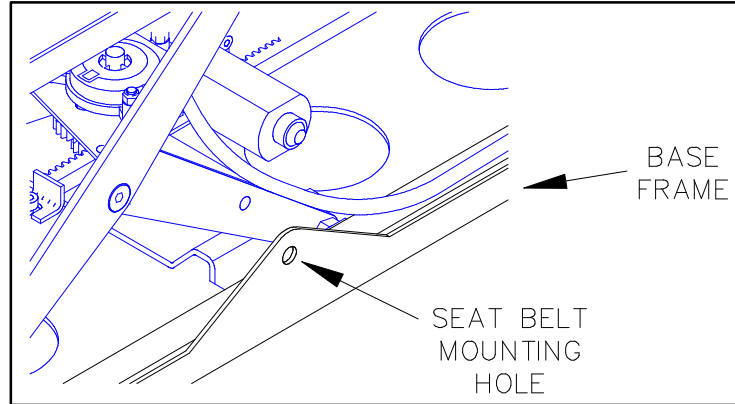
SEAT BELT MOUNTING LOCATION
